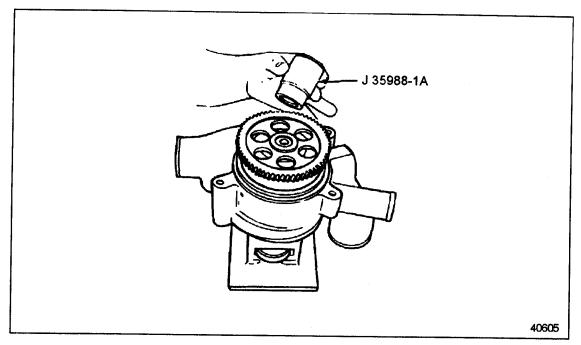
Water Pump Drive Gear Installation (GCM)
